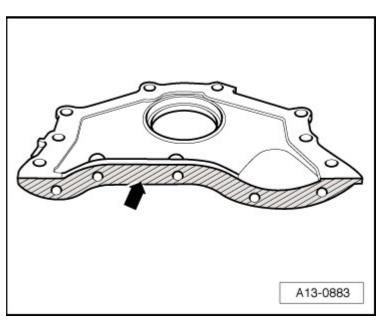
Lightly Coating Lower Sealing Surface Of Sealing Flange With Sealant Courtesy of AUDI OF AMERICA, LLC
